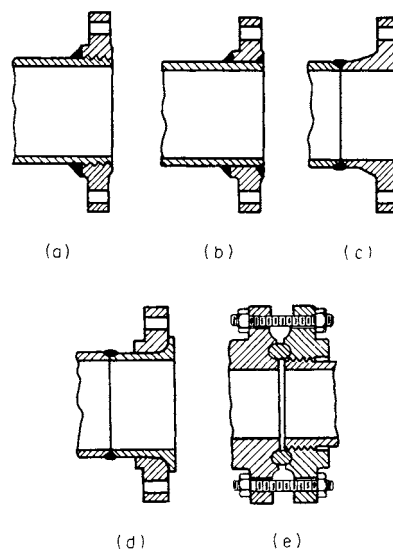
Welded flange joints and ring joint. (a) Forged steel, screwed flange, back-welded and refaced; (b) forged steel, slip-on welding flange, welded front and back, refaced; (c) forged steel, welding neck flange, butt-welded to pipe; (d) lap-welding nipple, butt-welded to pipe; (e) ring joint.
